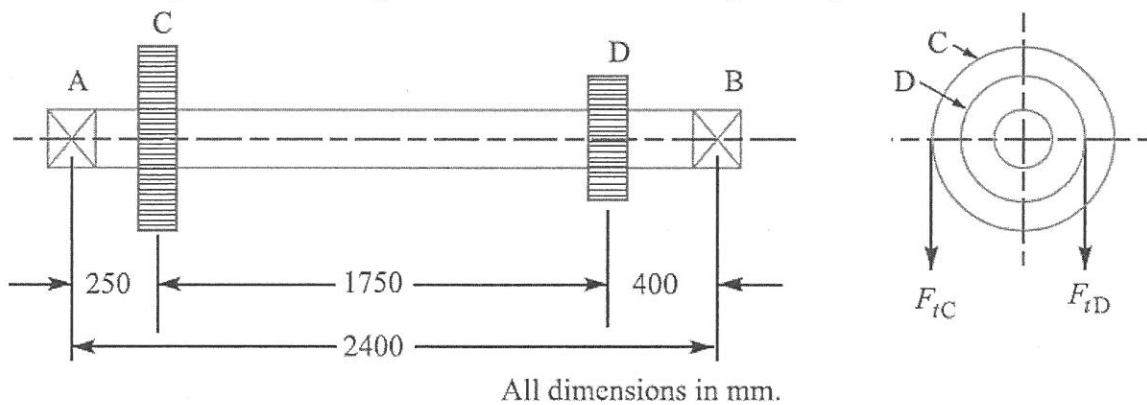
Horizontal nickel steel shaft rests on two bearings with two gears
